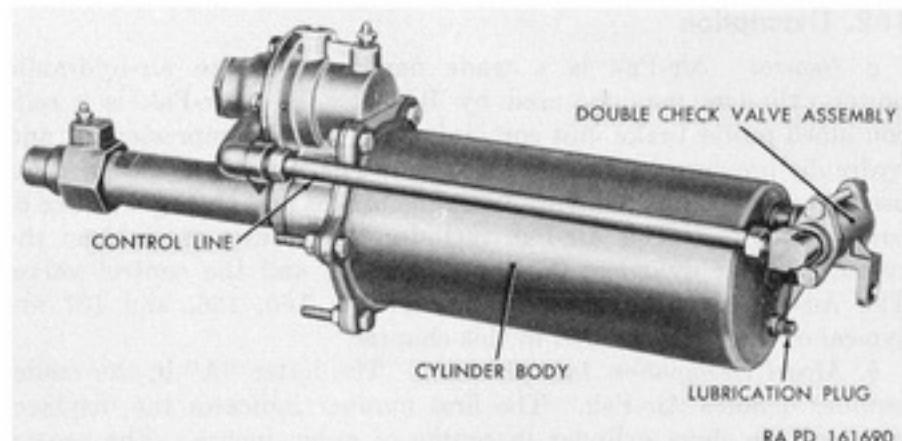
Model A65-11-148 air-hydraulic (Air-Pak) power cylinder—cylinder body end view.
